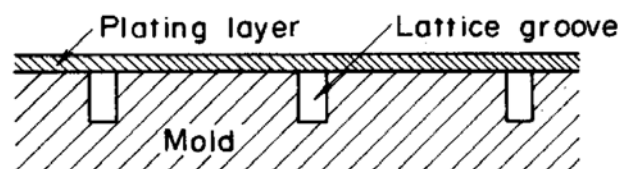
Schematic view of plating mould which includes lattice grooves cross section [56]
